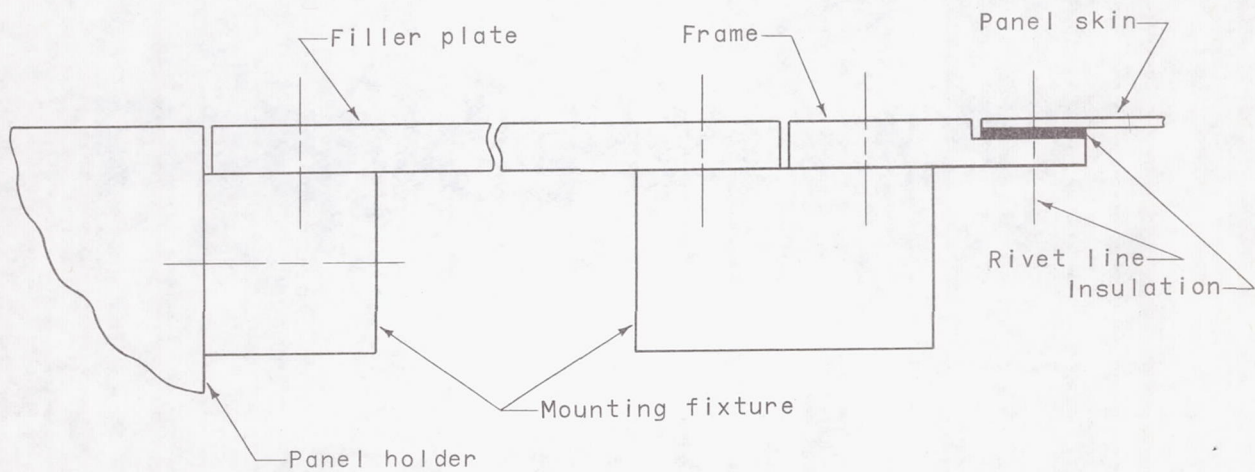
Cross section of panel holder. All dimensions are in inches (cm).
